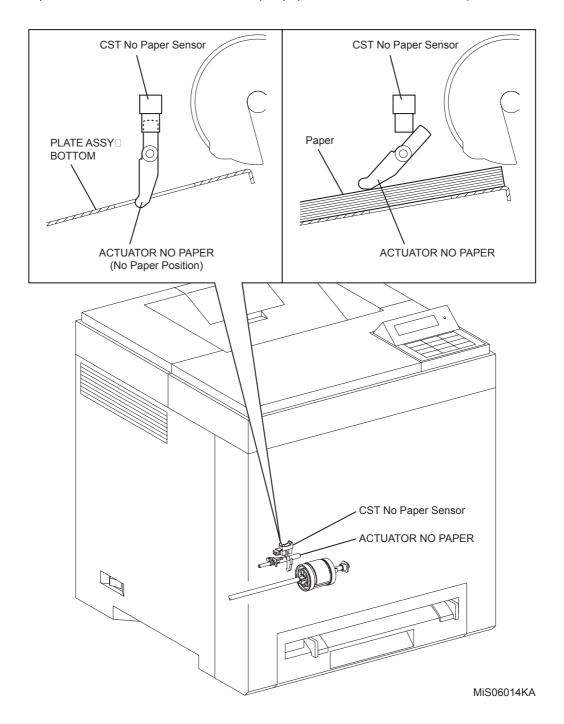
PLATE ASSY BOTTOM is locked to the bottom side when paper tray is pulled out from the paper feeder and unlocked when paper tray is installed to the paper feeder. Pushes the paper against the feed roll using a spring tension.
